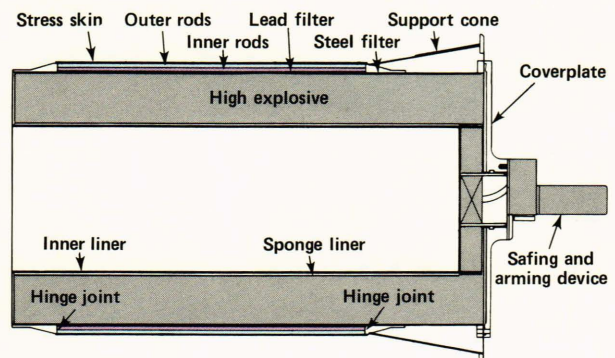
The Unified Talos 6c1 Mk 46 warhead was a hollow cylindrical structure. Quarter-inch rods arranged in a double layer and surrounding the explosive charge were welded at the ends to form hinge joints. At the explosive/rod interface, two filter layers — a 0.062-inch layer of steel and a 0.025-inch layer of lead — helped reduce the explosive effect on the steel rods.
